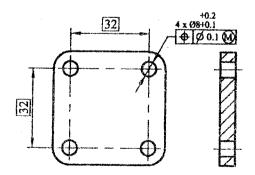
(a) - Positional tolerance of four holes related to each other
